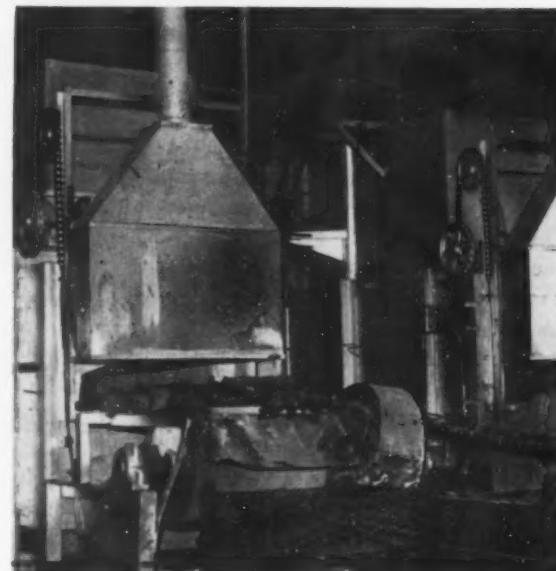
Discharge end of the furnaces. Both furnaces have all-cast construction.
